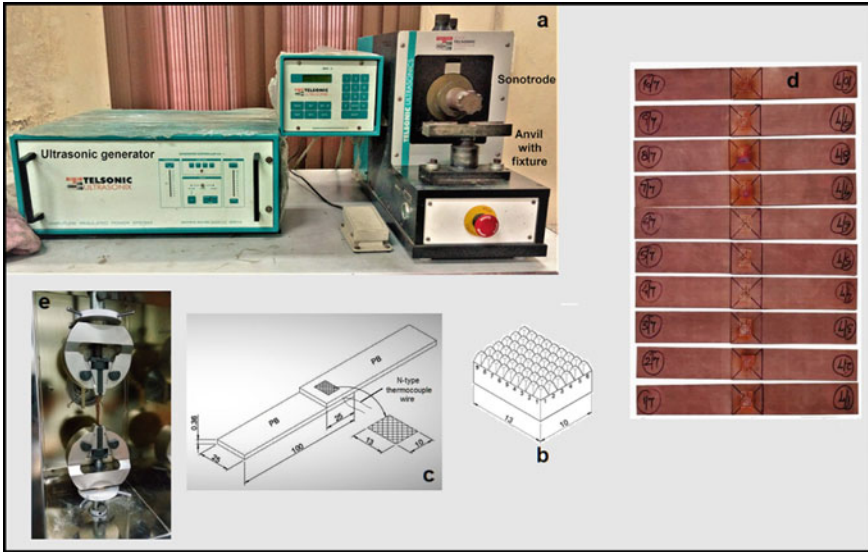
a Experimental setup, b sonotrode tip serrations, c schematic view of weld coupon, d welded coupons, e tensile–shear load testing of weld coupon
